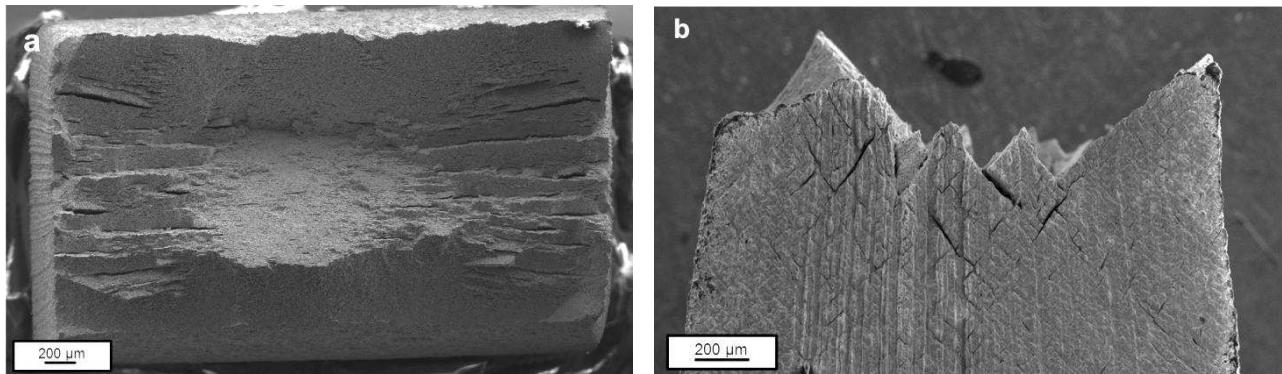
(a) Fracture surface of specimen tested at OCP, and (b) preferential dissolution of shear bands on the lateral surface.
